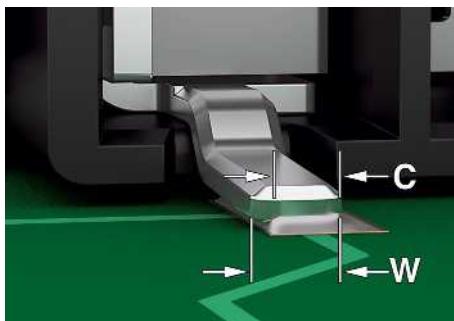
Flat gullwing connections, minimum width at the end of the soldering spot (C)
